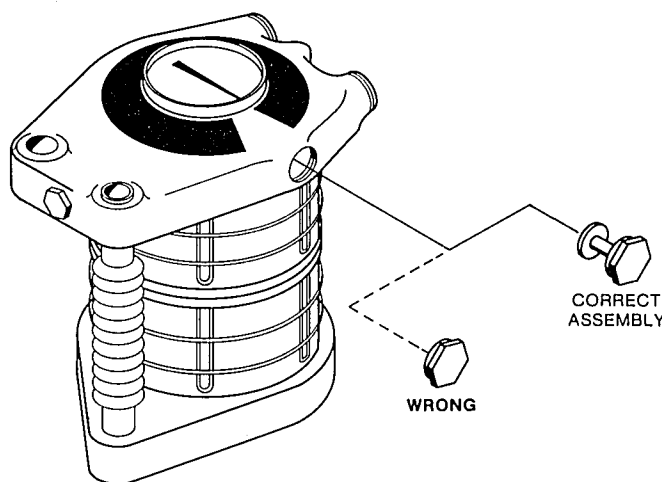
Ohio® Absorber—Model 20/21 bypass valve plug assembly.
